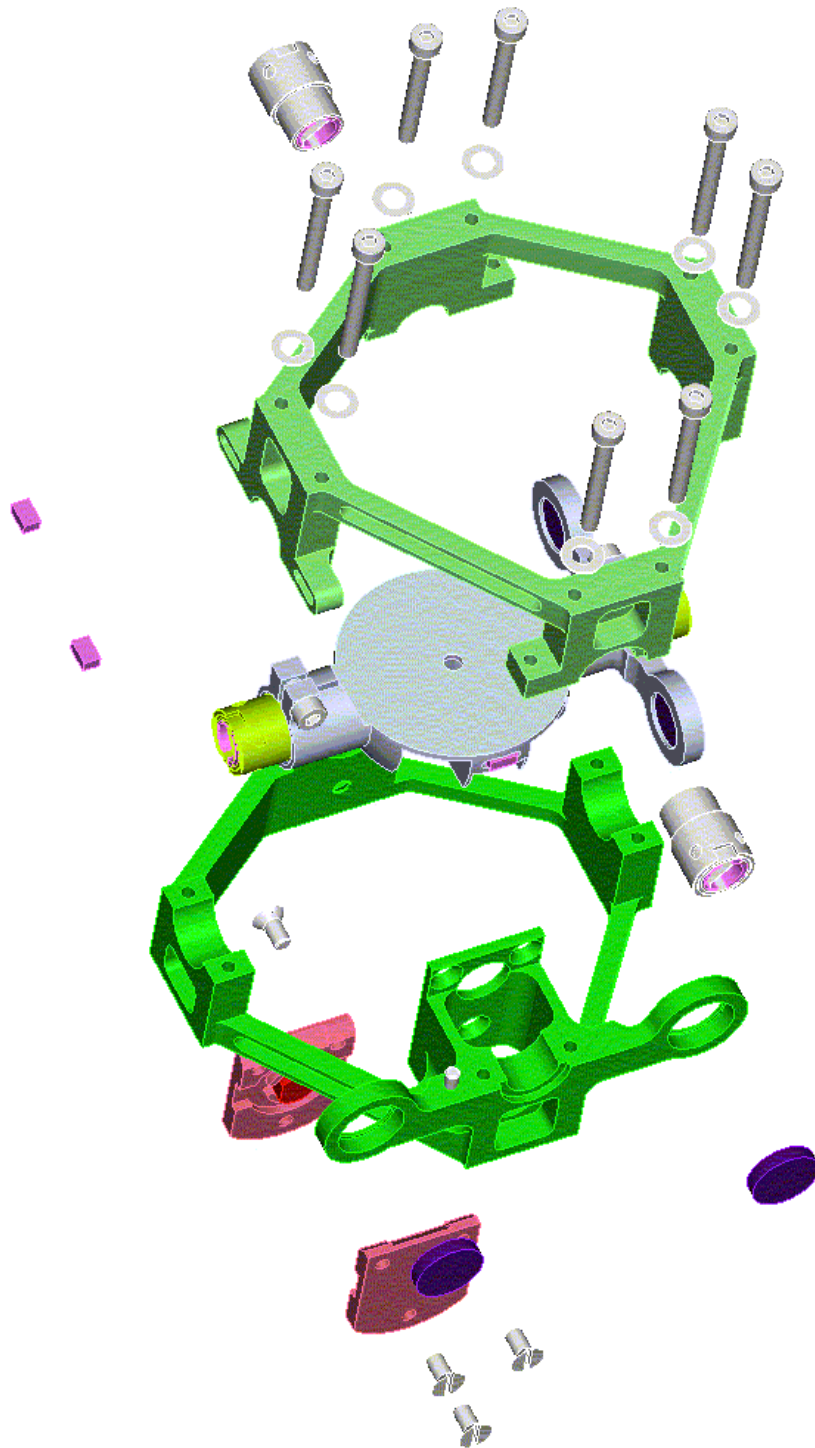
Jiggle stage assembly showing jiggle frame (green), sensor cores (pink), Infineon sensors (red)
